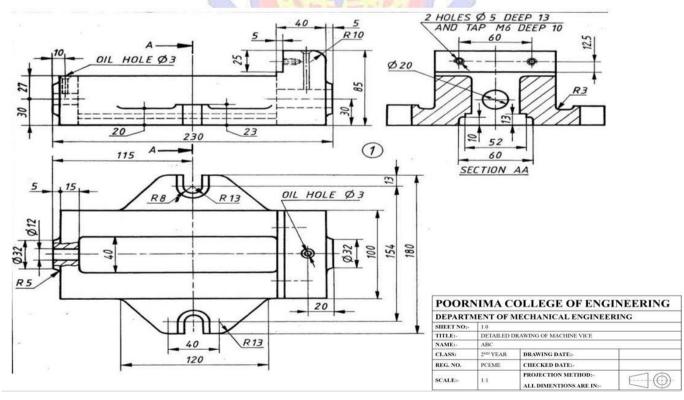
Detailed Part drawing (Machine Vice- Part-I)
